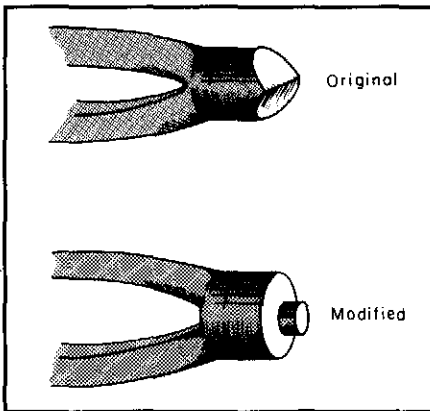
Bob McKay assembles PL-259 connectors with a soldering-gun tip filed to this shape. Be prepared to reshape or replace such a tip every few soldering jobs, though: Soldering-gun tips erode with use, contributing a fraction of their copper to every joint they solder.
